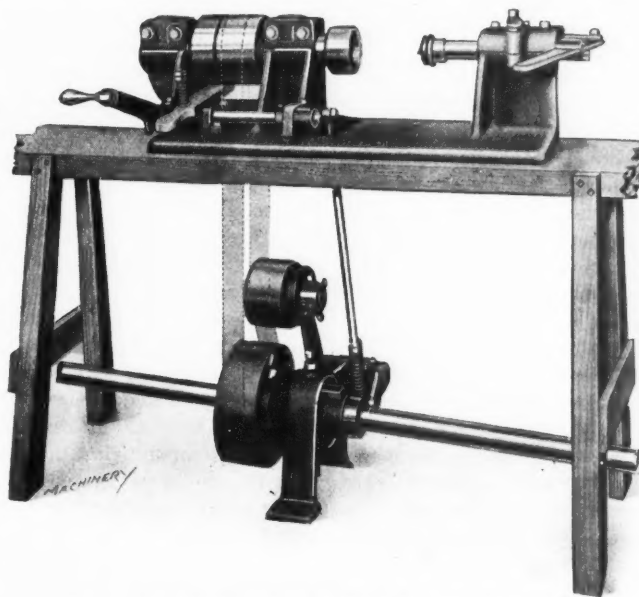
Machine for performing Filing, Burring and Polishing Operations on Shells
